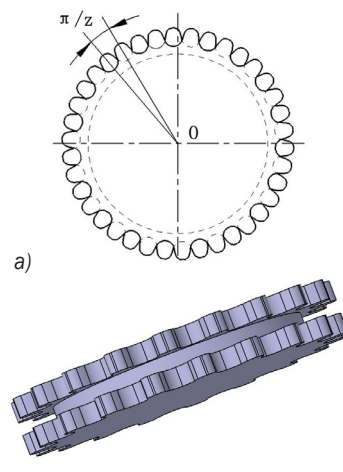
Schematic diagram of the dual-phase sprocket; a) Front view, b) side view
